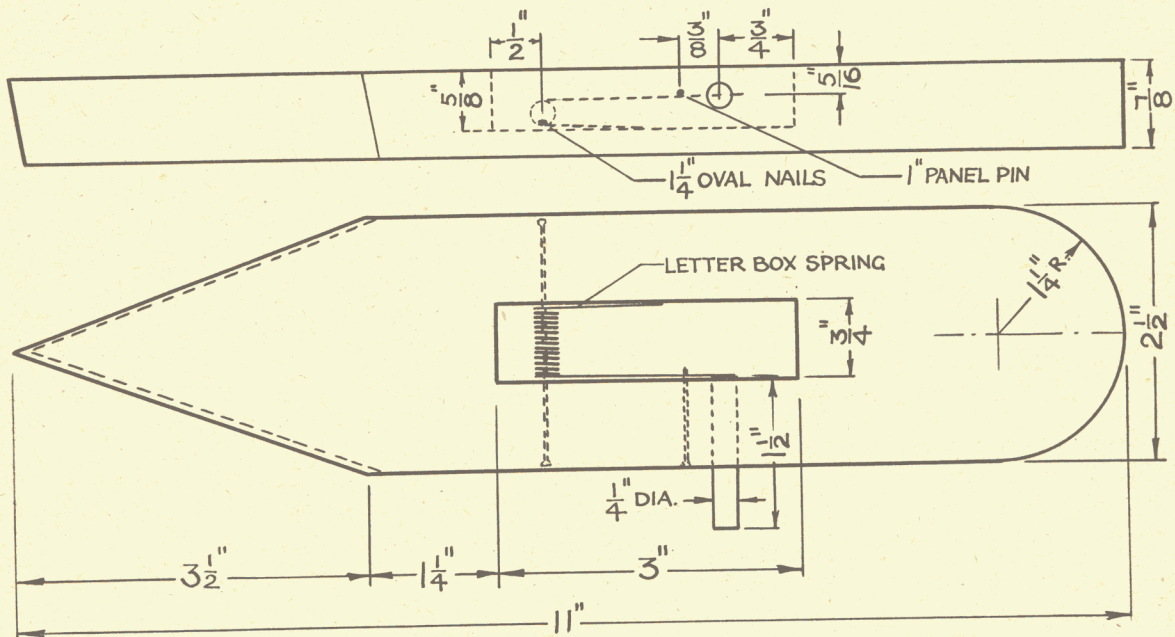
ELEVATION AND PLAN WITH MAIN DIMENSIONS
